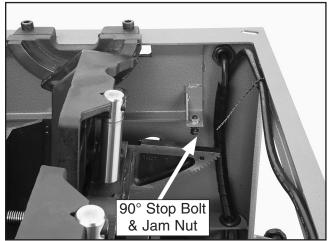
90° stop bolt and jam nut (table removed for clarity).
